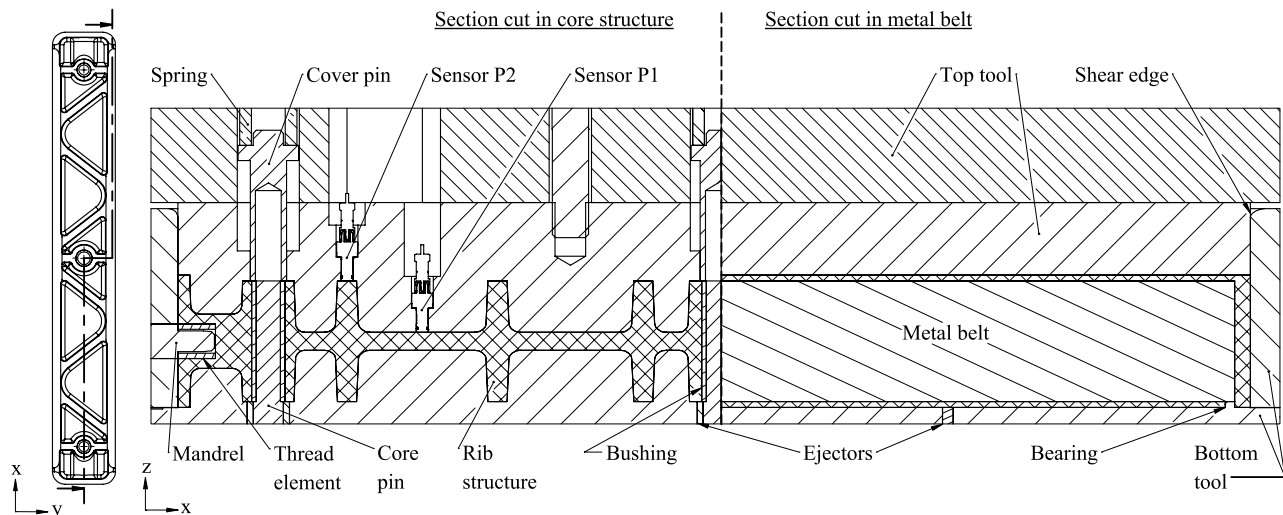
Section cut of hybrid beam in closed compression molding tool.
